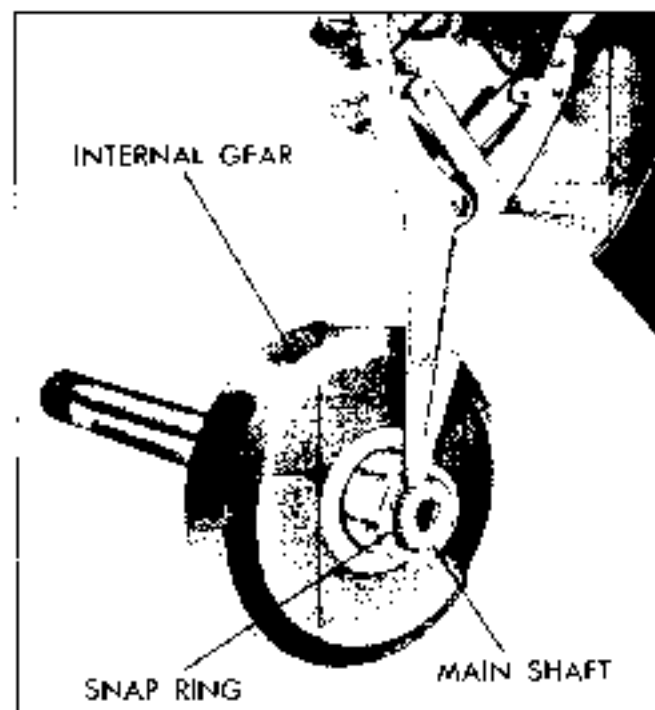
E-55—Removing Rear Internal Gear to Mainshaft Snap Ring
